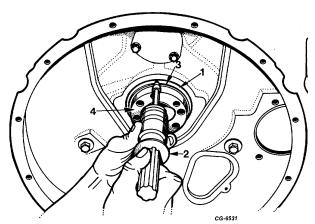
Removing Rear Main Oil Seal Using SE-2091 Seal Remover
